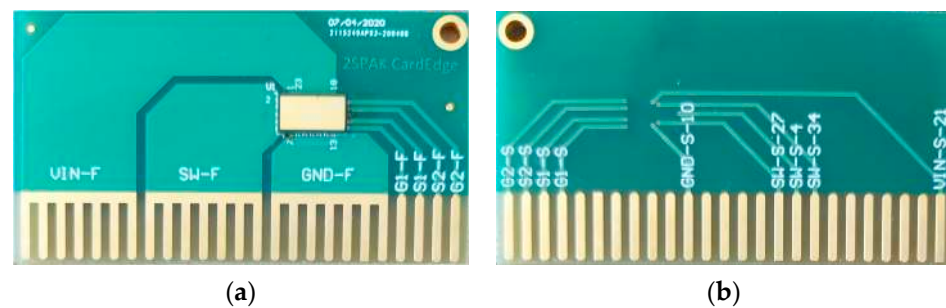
Shown is 2SPACK package soldered on the characterization board: (a) top side; (b) bottom side.
